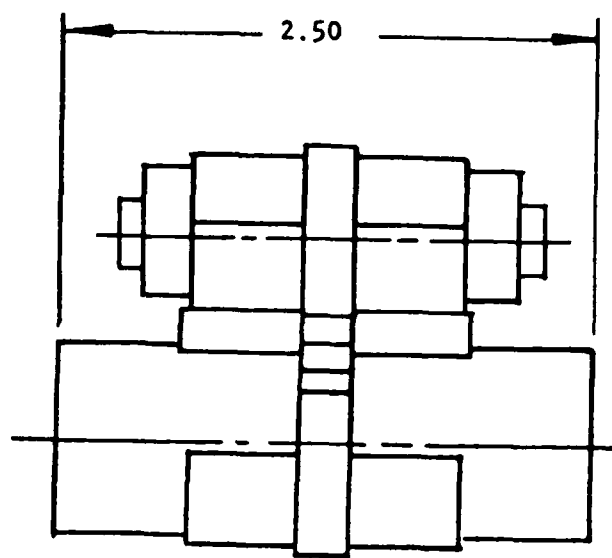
Outline drawing, "C" tail rotor drive shaft coupling.
